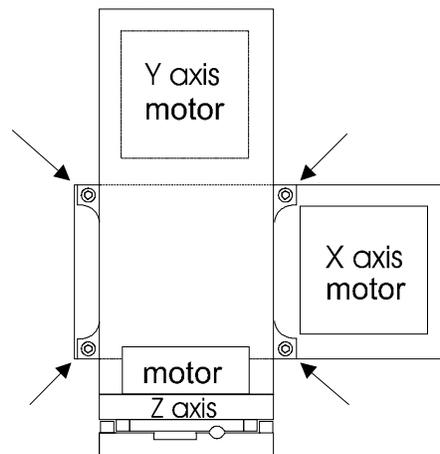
Y-axis mounting screws indicated by arrows (Right hand MP-285, top view).
